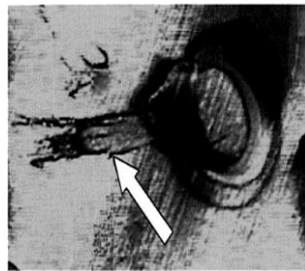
Expulsion traces at the faying interface of a steel weld [13].
